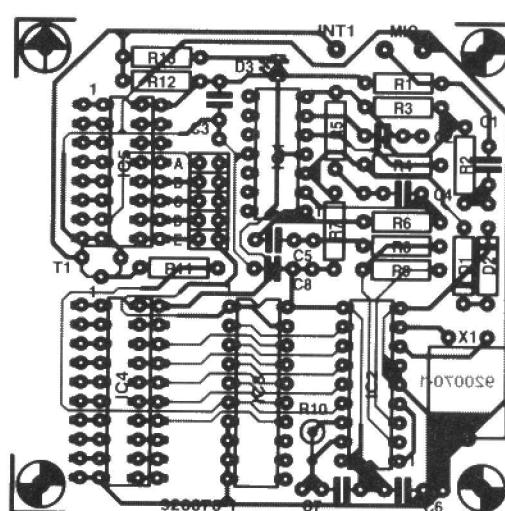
The PCB for the DTMF decoder is fitted 'piggy back' on to the 80C32 extension board. Sockets with extra long pins are used in positions IC4 and IC5. These pins are inserted into sockets IC2 and IC3 on the extension board.
